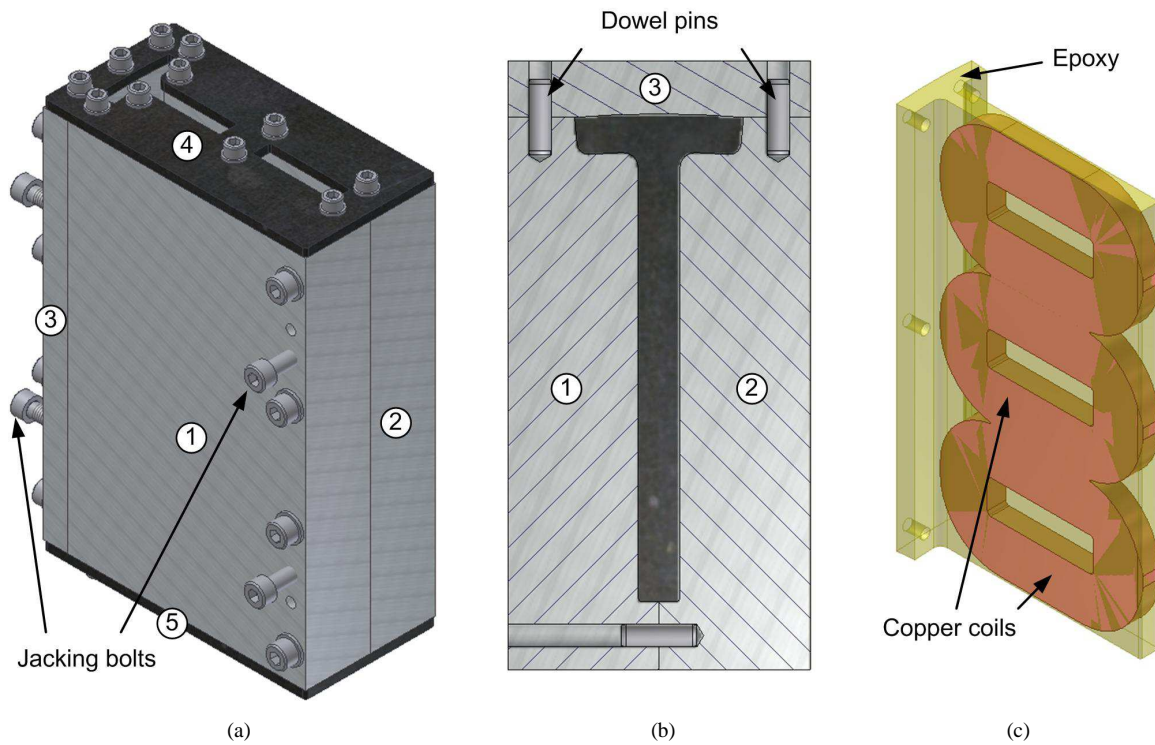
(a) A 3-D CAD model of the stator mould, (b) a sectional view of the stator mould and (c) one stator section.
